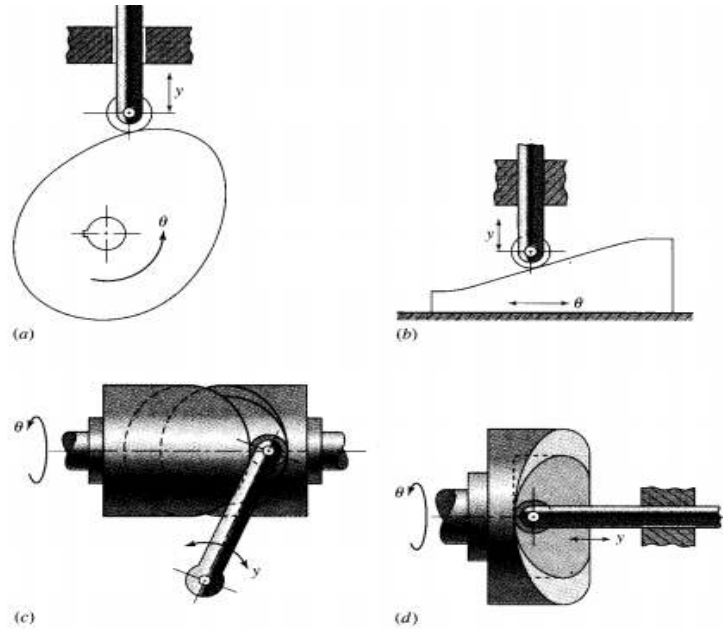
Types of cams:(a)plate cam; (b)wedge cam; (c)barrel cam; (d) face cam. (Theory of machines and mechanisms, Uicker, Jr.)
